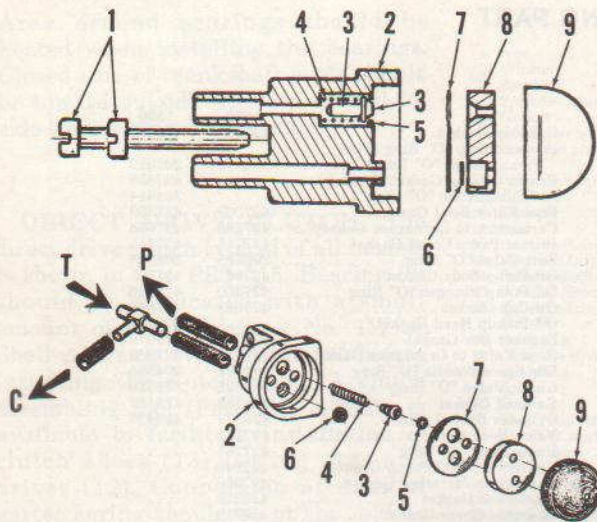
Exploded and cross sectional views of the fuel primer pump. Fuel from tank enters at (T). Short hose connects to normal fuel fitting of carburetor (C). Primer hose (P) connects to the primer fitting (14—Fig. PR6-1) of carburetor.
